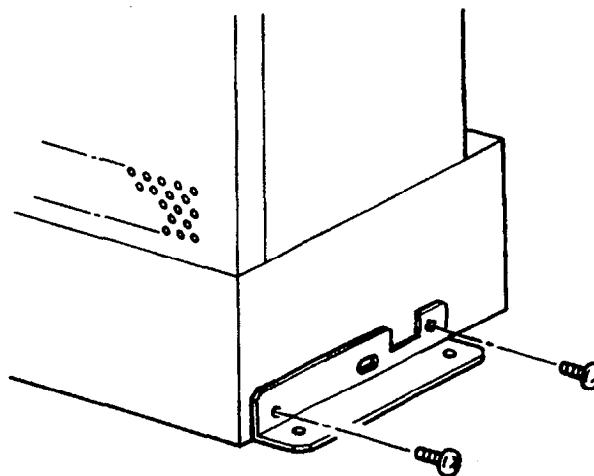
Attaching the Floor Mount Bracket to Basic KSU
